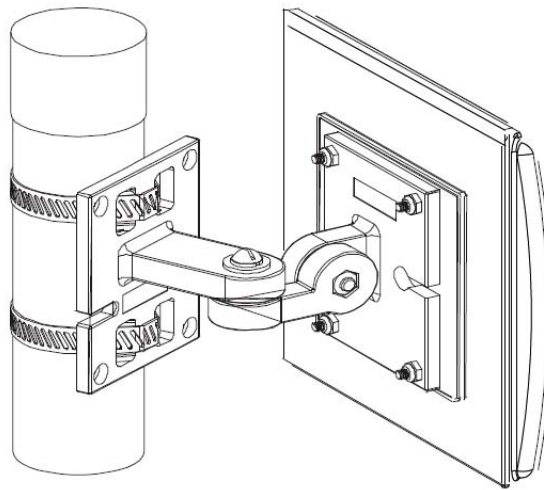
WS-AIO-5S17017 Antenna Mounting Kit and Assembly
